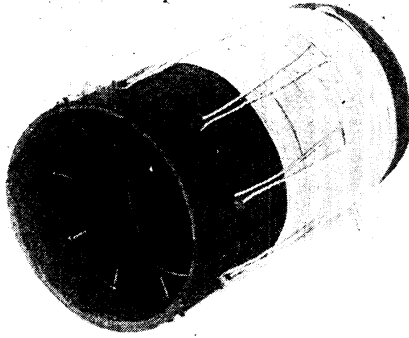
Plugged into the end of the former is a disk of wood, and the contact arm, as illustrated, is carried from the turning knob over the edge of the former to meet the studs seen in Fig. 1
